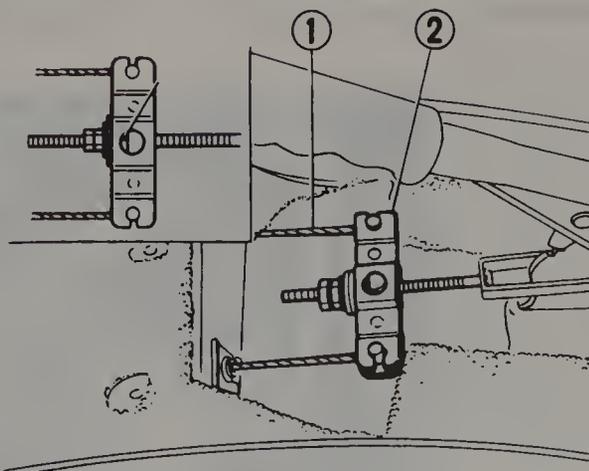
Parking brake adjustment equalizer (Sec 3)
